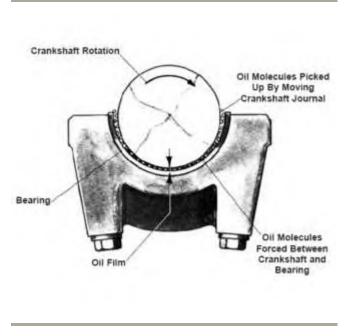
02142847Oil film between crankshaft journal and bearings.
